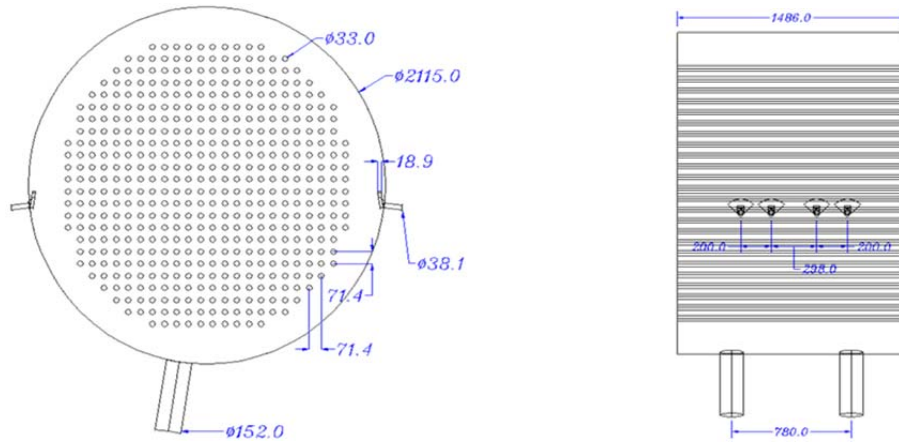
The schematic drawing of the MTF tank (all dimensions are in mm).
